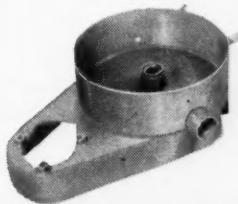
Present Welded Steel Design—Stronger, more rigid. Weighs only 43 pounds. Material Cost \$2.50; Fabrication—\$9.77. Total Cost—\$12.27.
